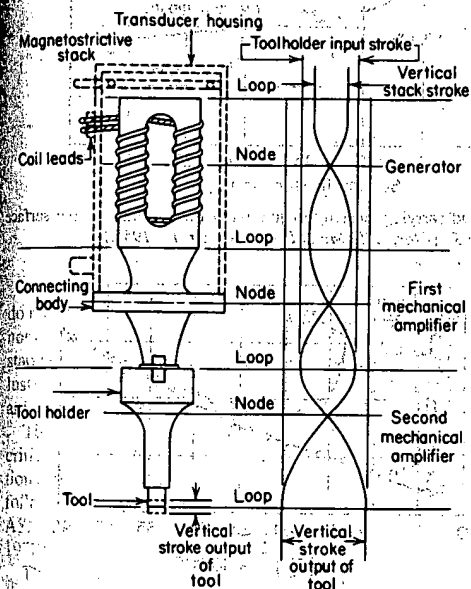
Schematic diagram of a transducer used in the ultrasonic machining (USM) process.
